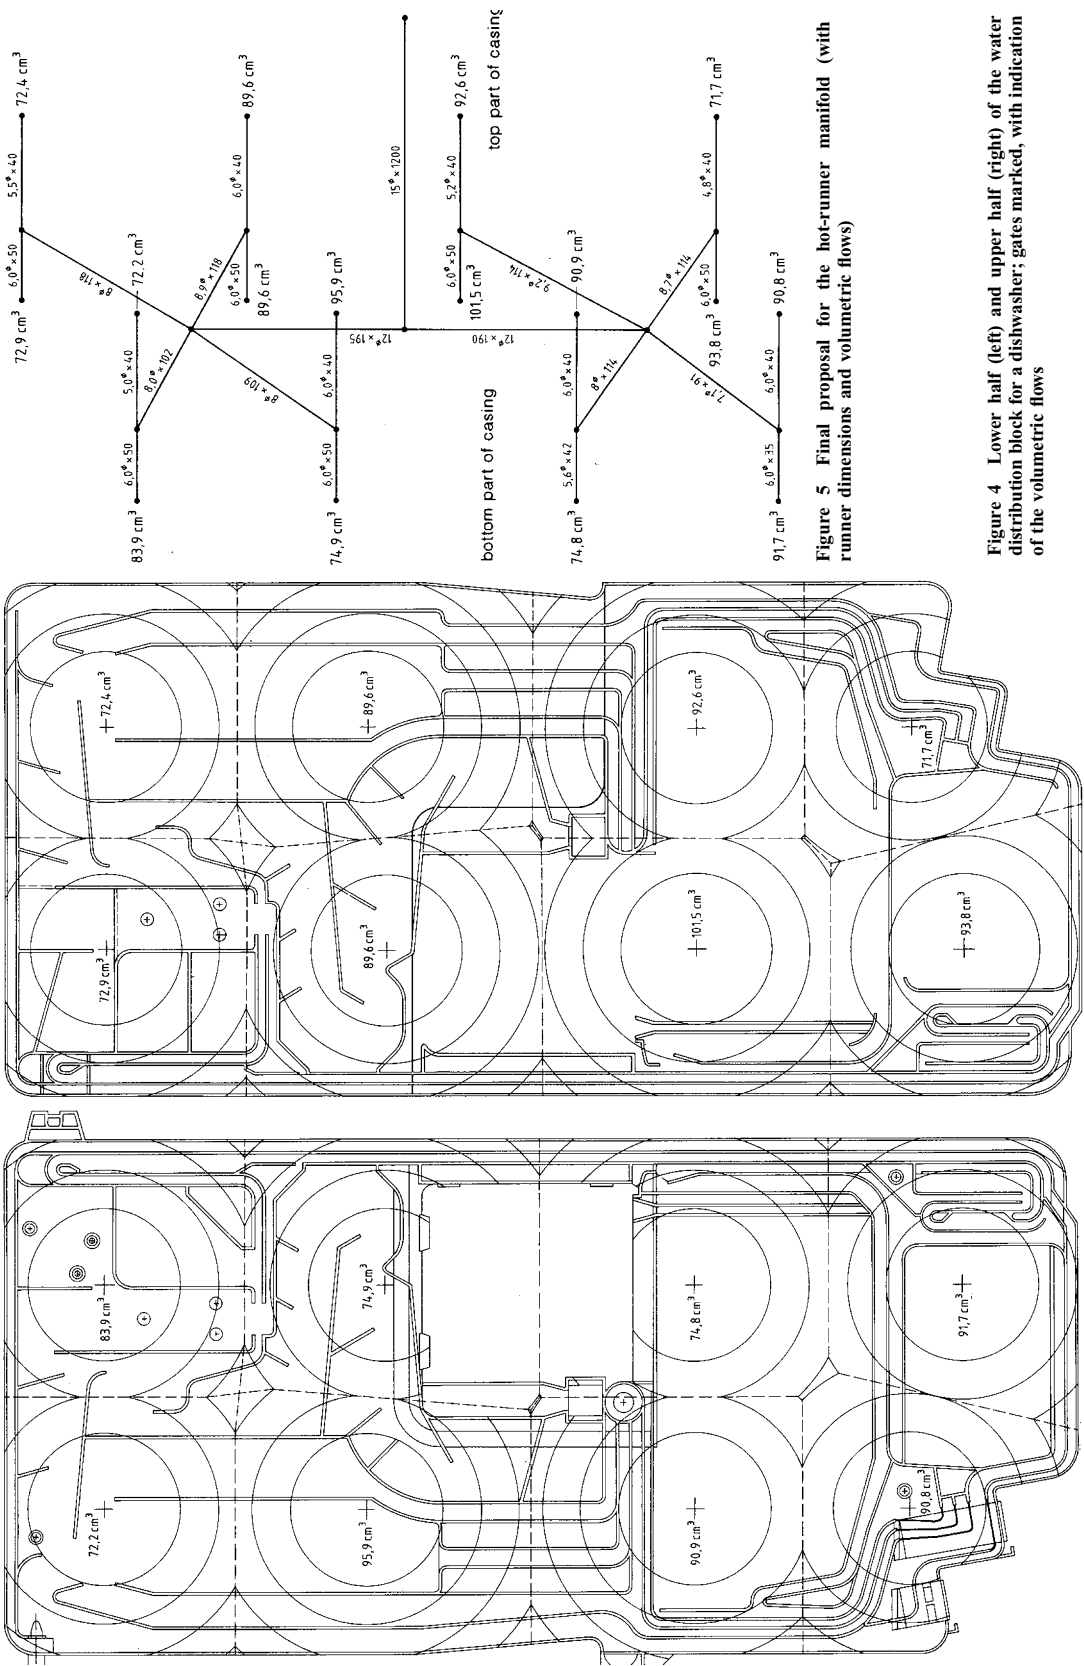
Final proposal for the hot-runner manifold (with runner dimensions and volumetric flows)
